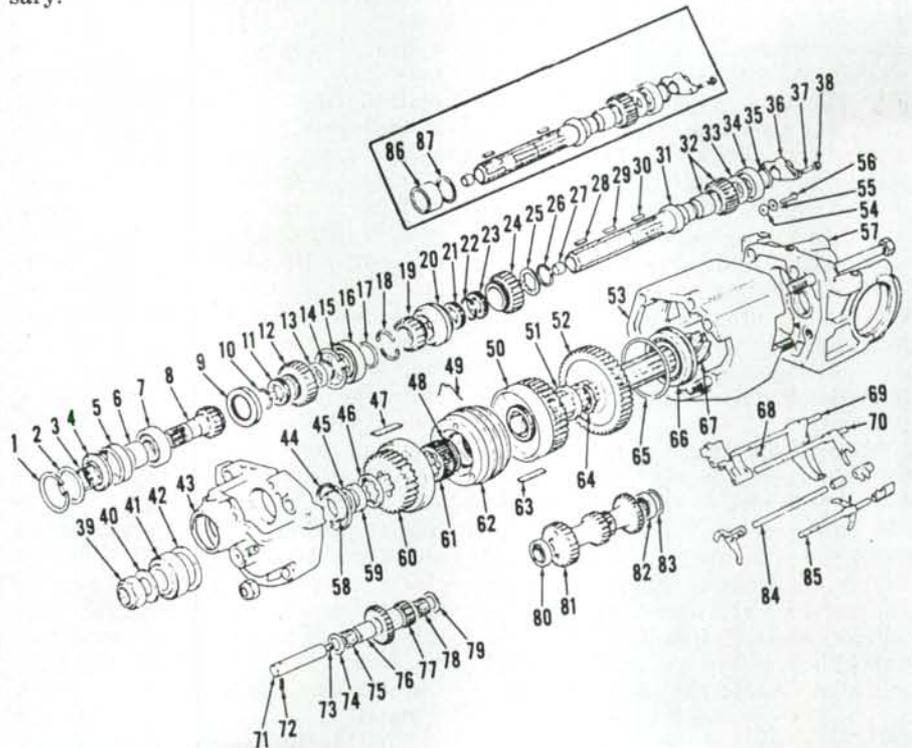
Exploded view of 12-speed synchromesh transmission used on Model 1690. Transmission used on late 1394 and 1494 models and all 1594 models is similar except that a spacer and shims (inset) are used in place of washer (25) and snap ring (26) to locate components on input shaft (31)
